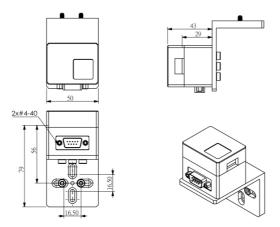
Mechanical drawing of the OV-30D including L-adaptor board
